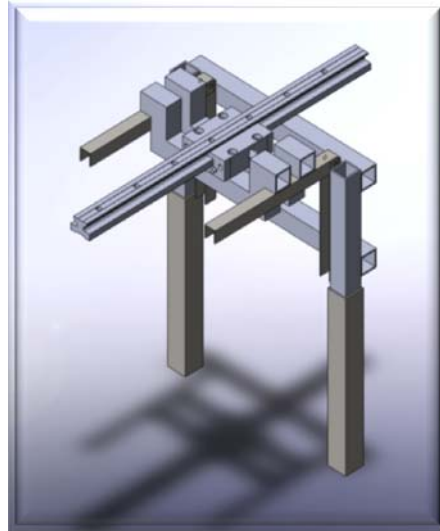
Redesign 2 - Ball Bearing Slide Mechanism
